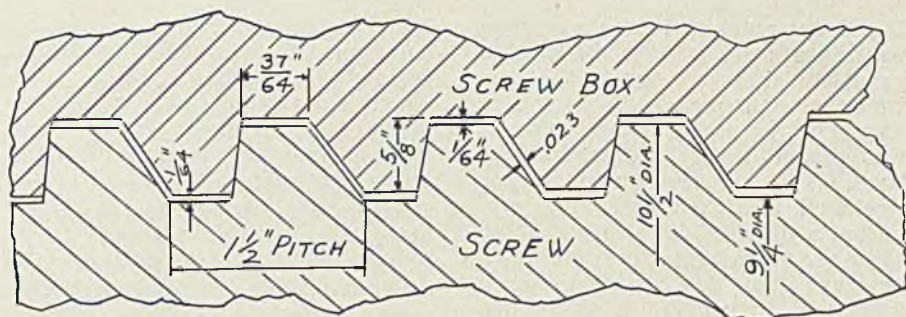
Cross section of the nut and screw showing the small runout permissible
